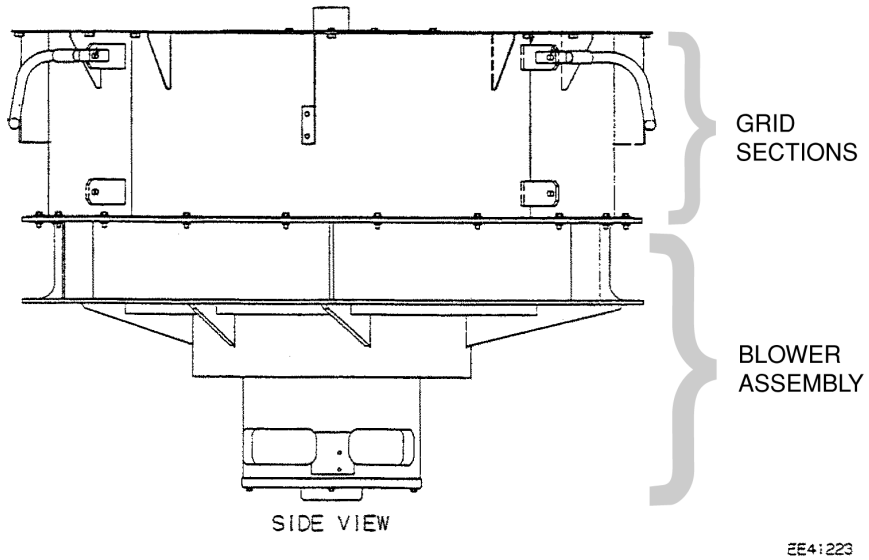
Typical Radial Dynamic Grid and Blower Assembly
